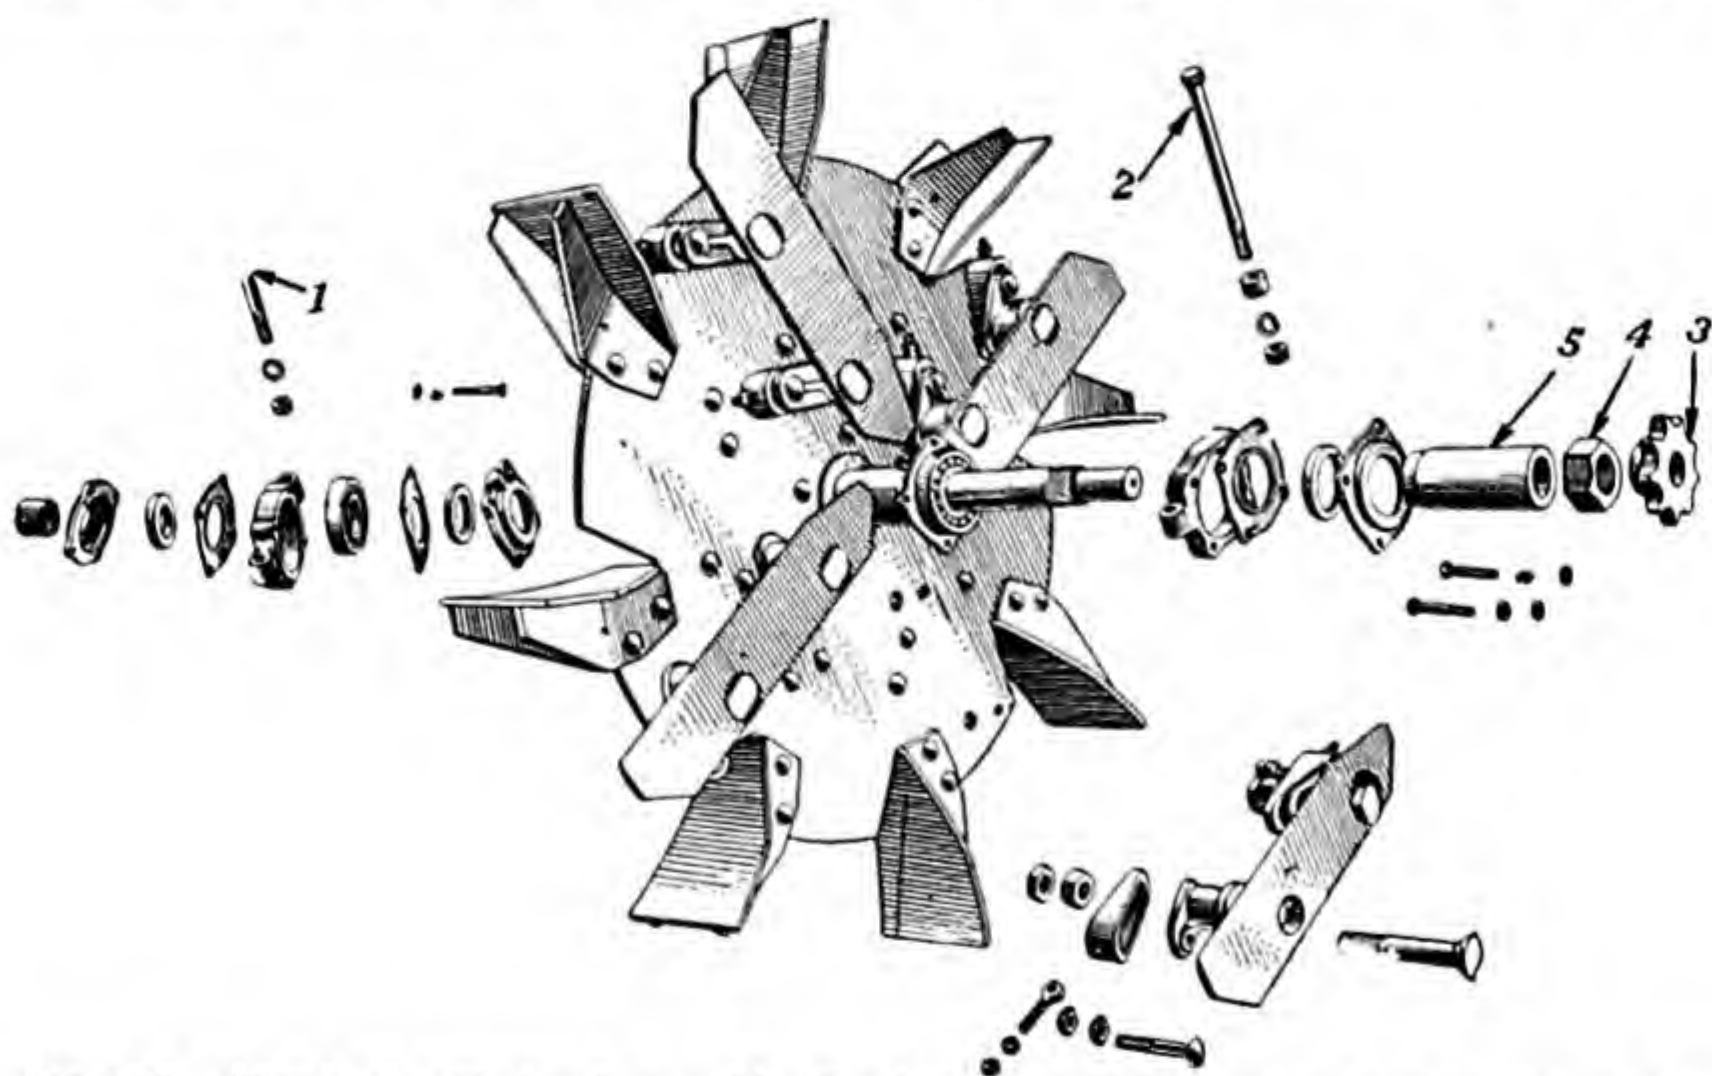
Flywheel cutterhead assembly showing component parts of bearings and knife. since falling against the lever would throw the machine into neutral or reverse position.
